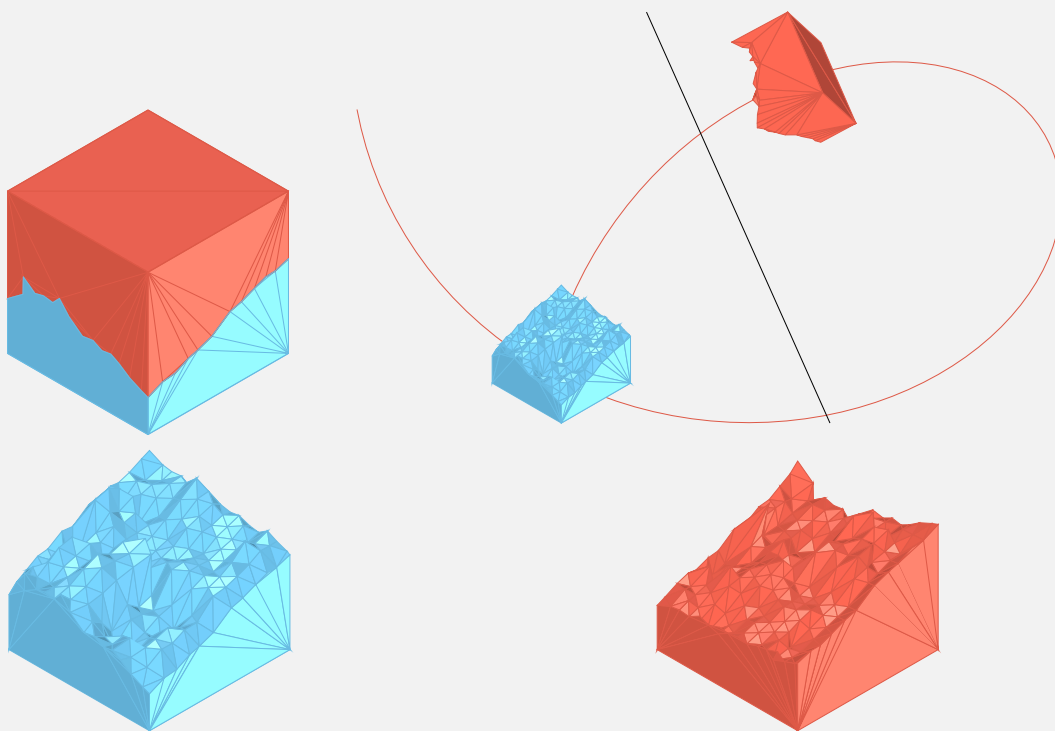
A 3D two-parts assembly and the disassembling trajectory.
